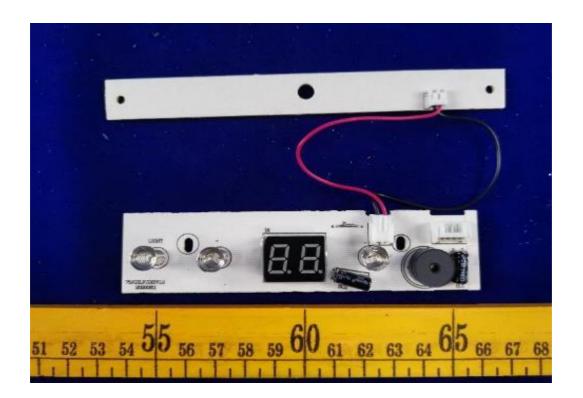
Electronic control panel PCB of models JC-90VEX-F and JC-90VEL-F (Rear)
